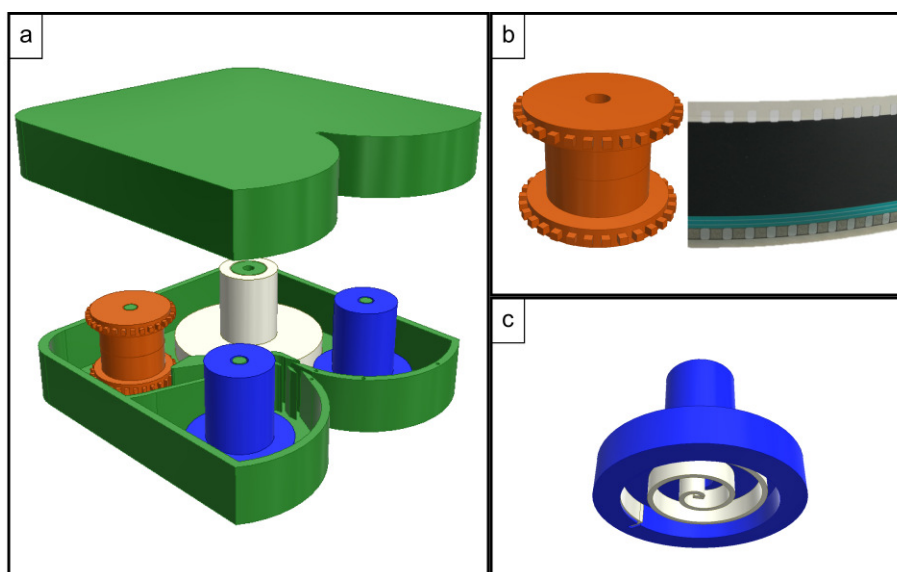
3D-CAD model of a dosing device draft using a dosing roll with notches to convey an ODF with a packaging perforated like a photographic film (a and b). 3D-CAD model of the waste roll with a spiral spring responsible for the motion in the device (c).
